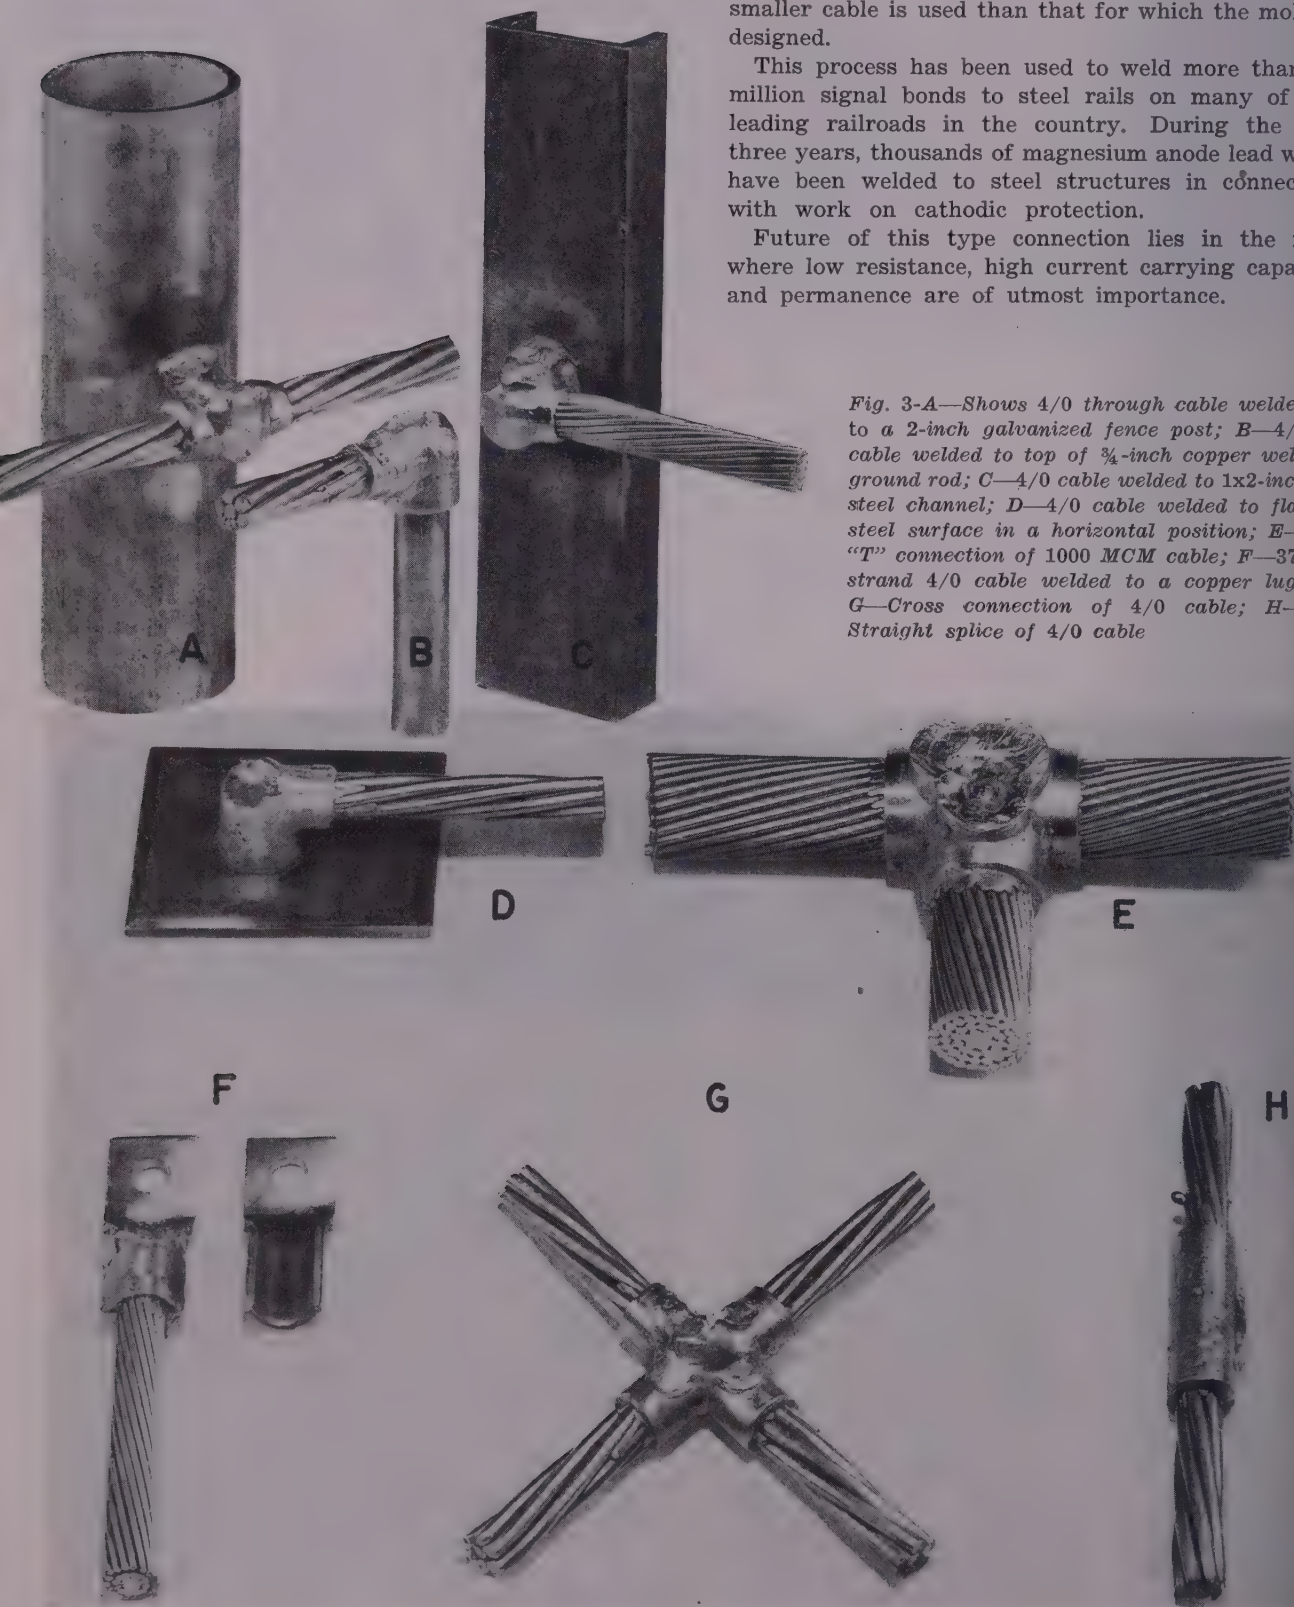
A—Shows 4/0 through cable welded to a 2-inch galvanized fence post; B—4/0 cable welded to top of 3/4-inch copper weld ground rod; C—4/0 cable welded to 1x2-inch steel channel; D—4/0 cable welded to flat steel surface in a horizontal position; E—"T" connection of 1000 MCM cable; F—37-strand 4/0 cable welded to a copper lug; G—Cross connection of 4/0 cable; H—Straight splice of 4/0 cable
